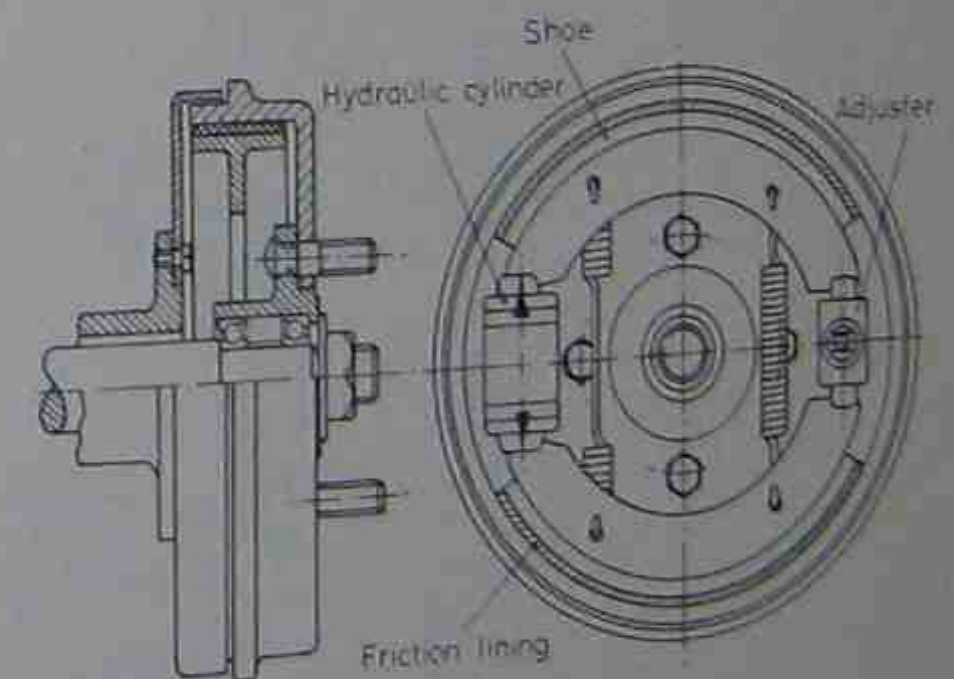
Internal expanding shoe brake (automobile-type drum brake)
